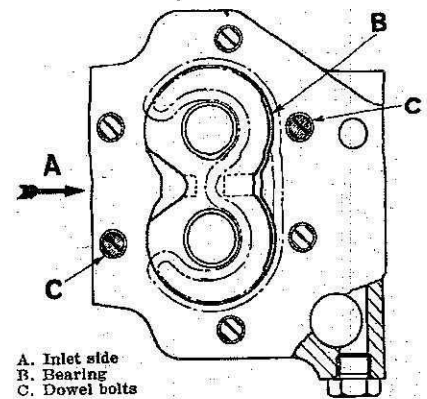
Cross-sectional view of Plessey hydraulic pump; refer to Fig. 193 for exploded view.
